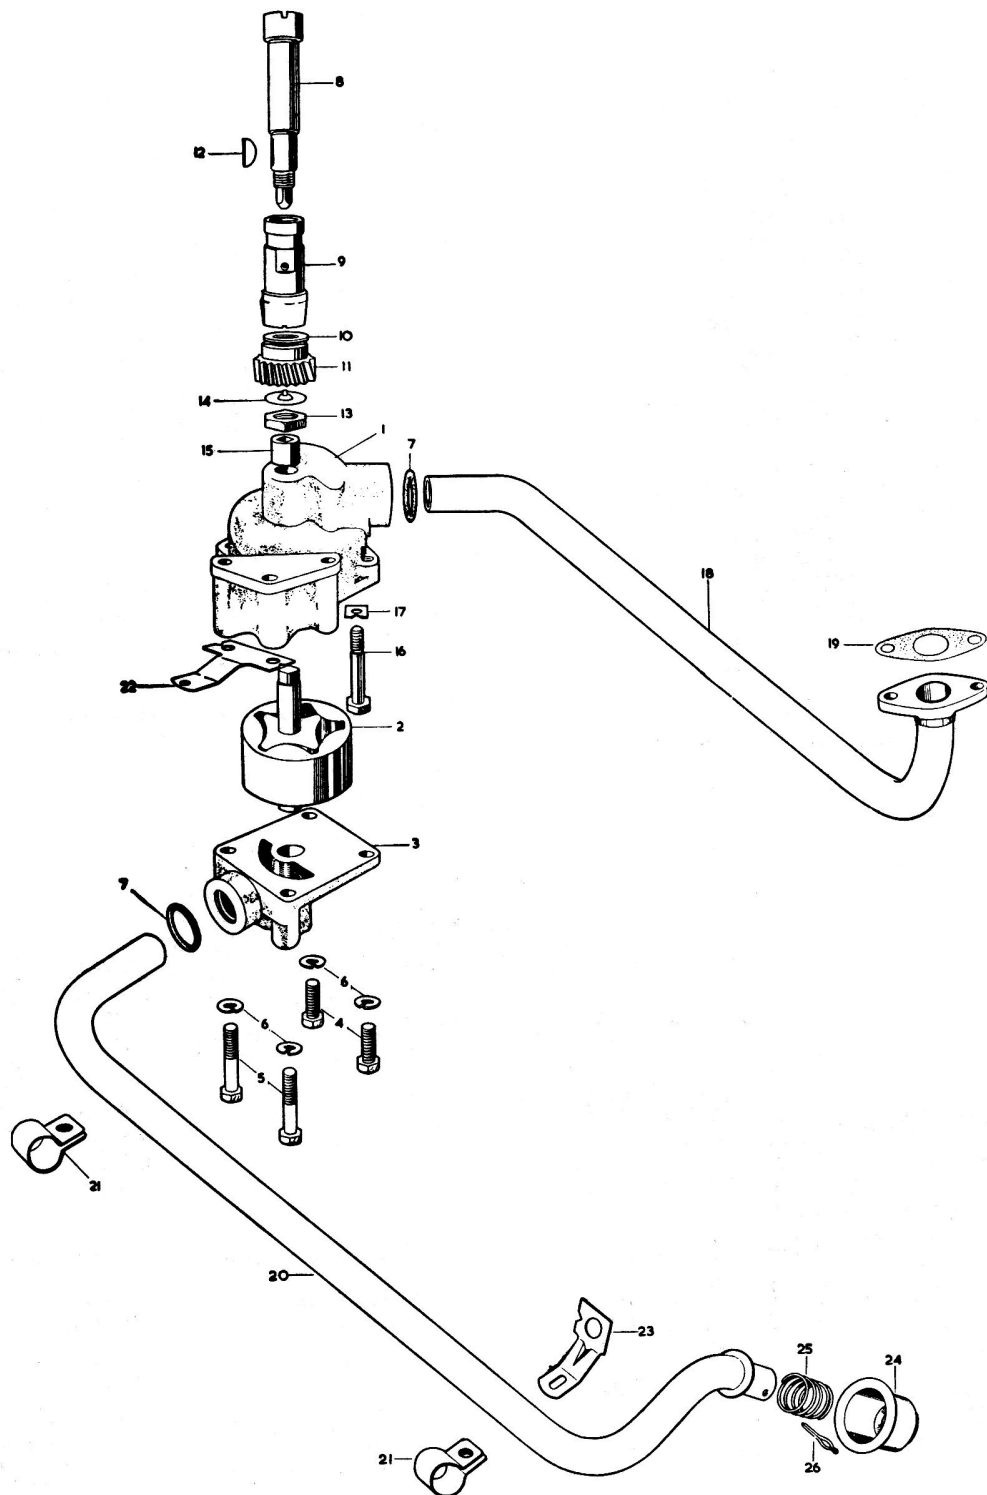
EXPLODED VIEW OF THE OIL PUMP
